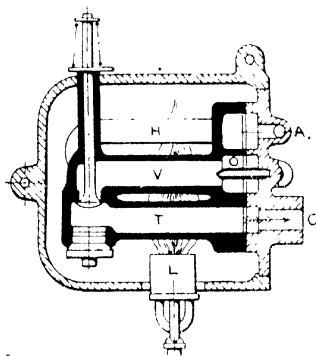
Flame- and explosion-heated vapour-feed vaporiser used on Filding paraffin-oil engines.
